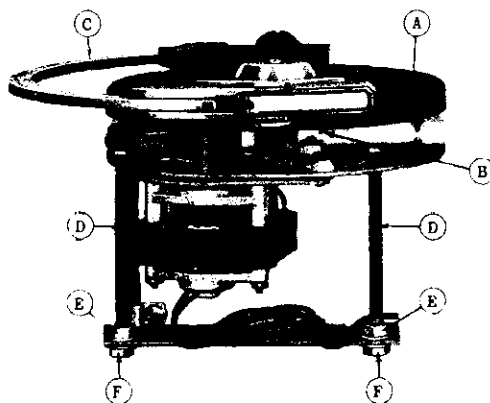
TURNTABLE AND ASSOCIATED PARTS
